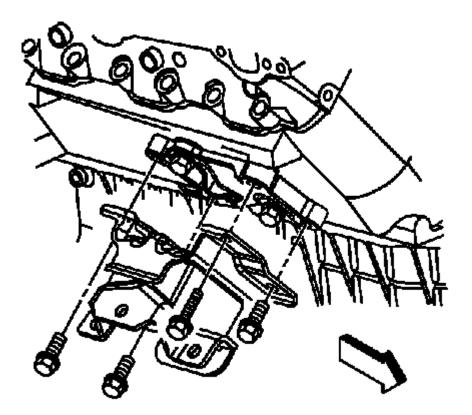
View Of Right Side (Left Side Similar) Engine Mount Bolts Courtesy of GENERAL MOTORS CORP.
